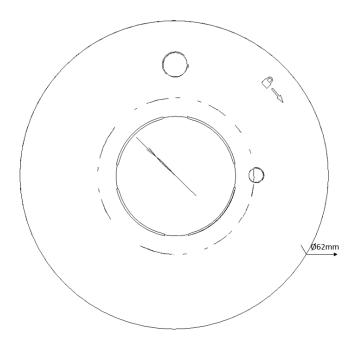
Modbus Gas and TrueVOC Sensor Dimension - Top View
